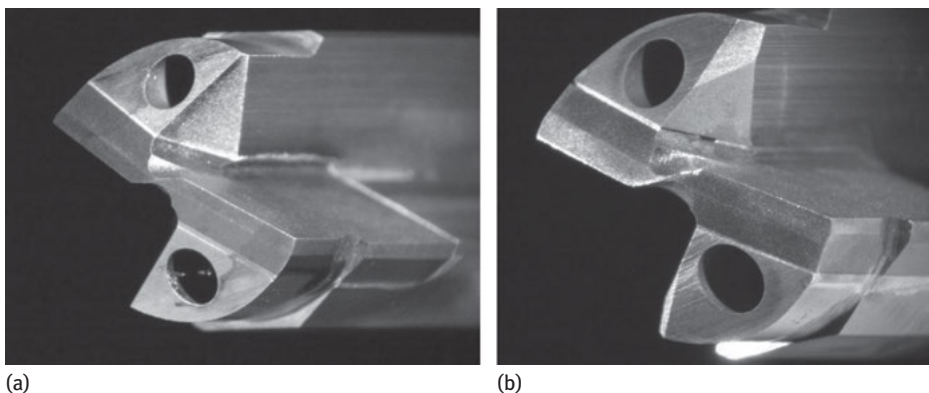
Showing the proposed drill for HPR drilling of HSAA: (a) new tool and (b) tool after tool life (25,000 holes).
